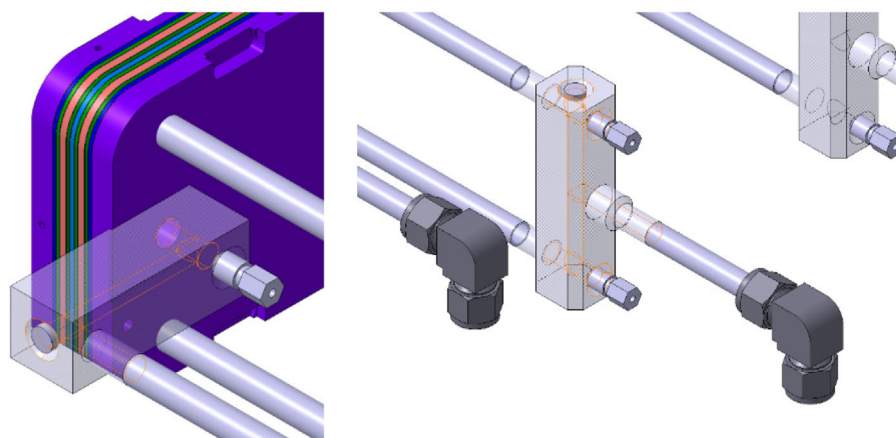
Construction details of the pipework. Left: outrigger, welded to the connection plate. Right: splitter for the feed gases and piping with Swagelok connection to adjacent equipment. Both components with feedthroughs for thermocouples.
